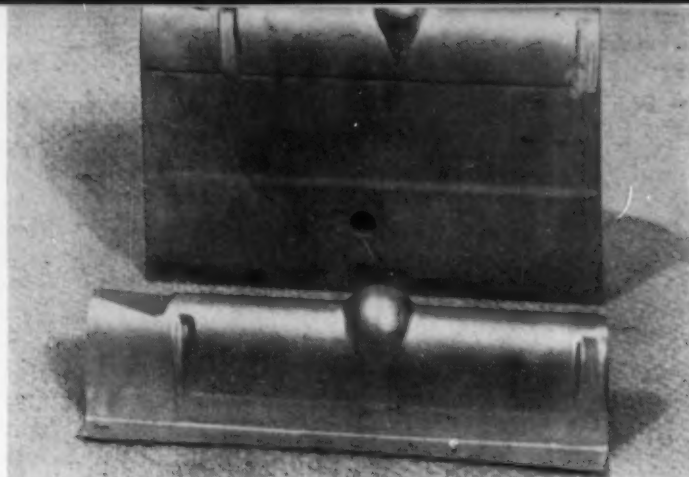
Mating parts formed from 61 SO aluminum, with the punches used in production of the parts.
